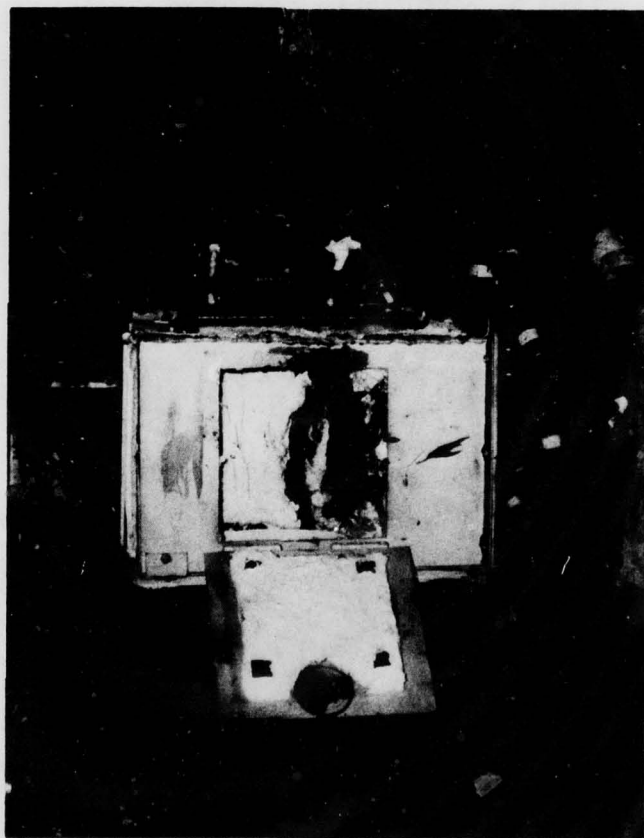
The Furnace and Die Section (See Figure 18) of the 500-Ton Lombard Hydraulic Forging Press
